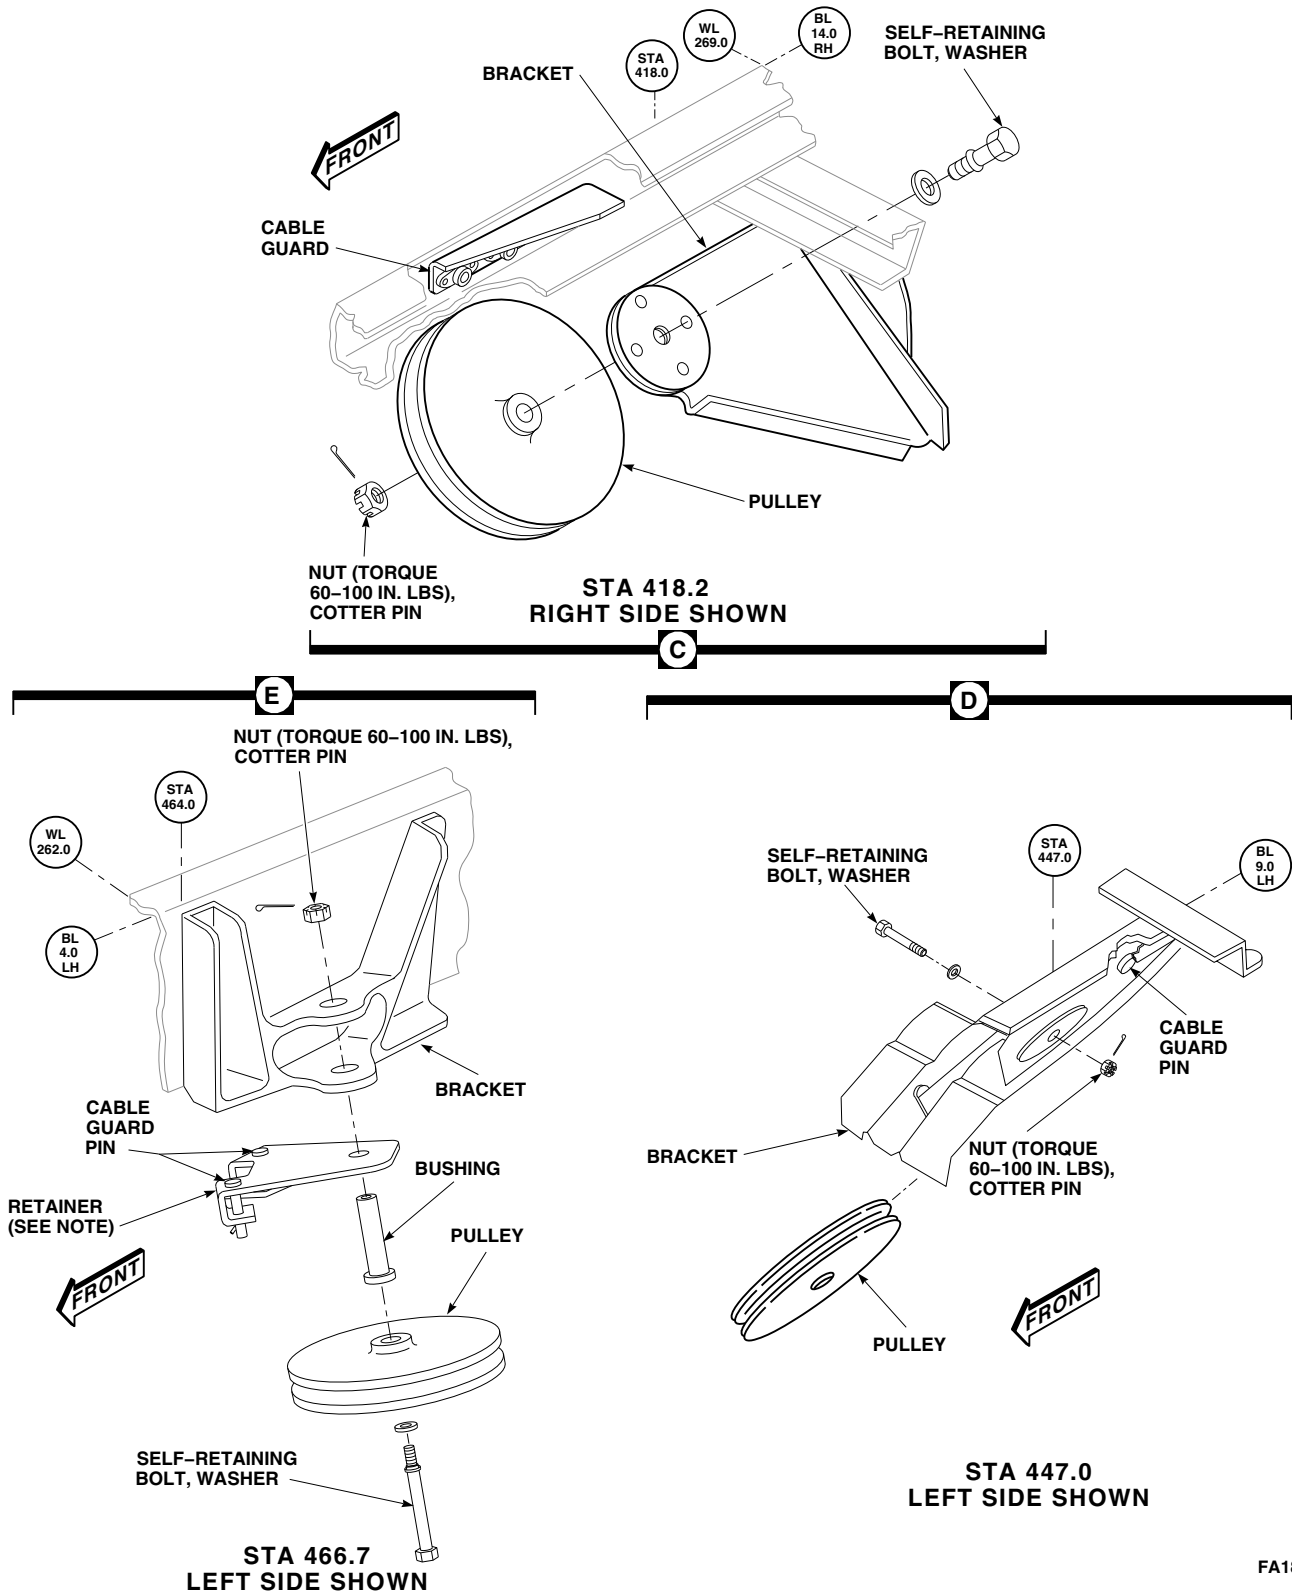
REPLACE FLIGHT CONTROL CABLE PULLEYS (SHEET 3 OF 5)
